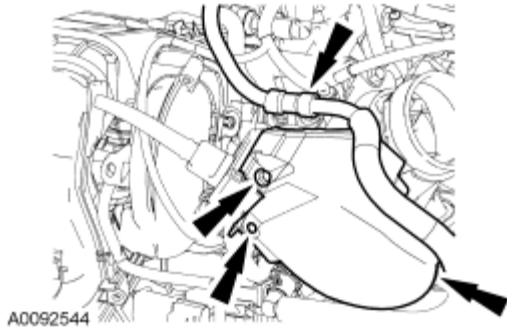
Locating Accelerator Snow Shield, Screw And Pin-Type Retainers
